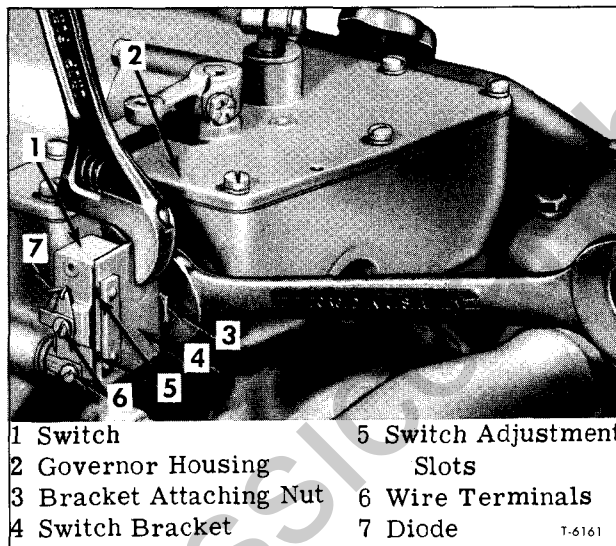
Loosening or Tightening Switch Bracket Mounting Nut
